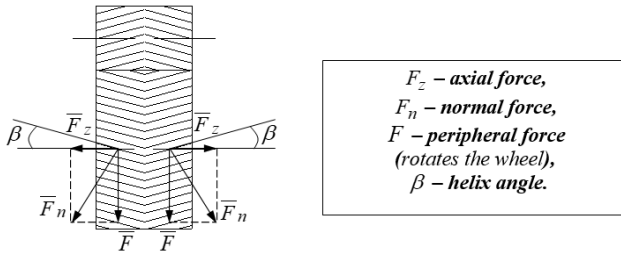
Forces in transmissions with double-helical gear wheels
